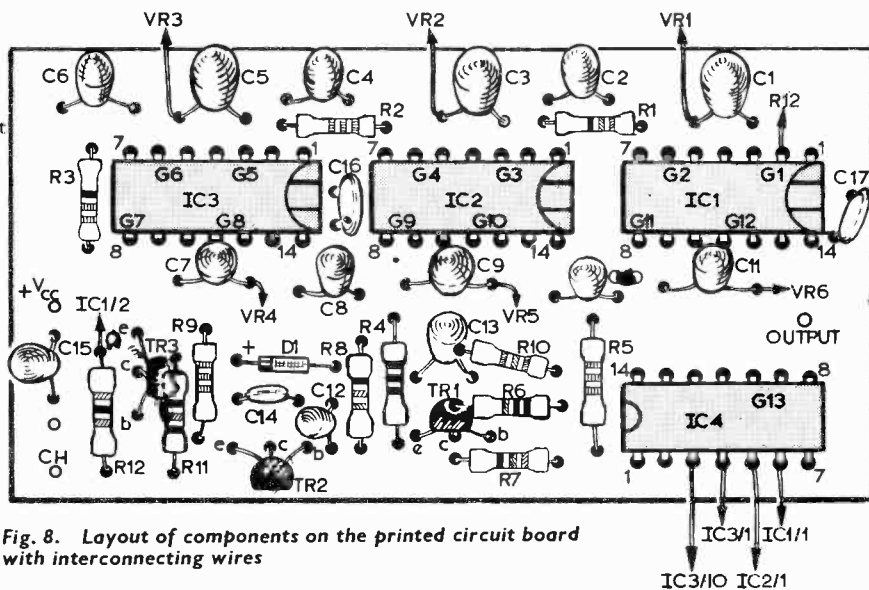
Layout of components on the printed circuit board with interconnecting wires
